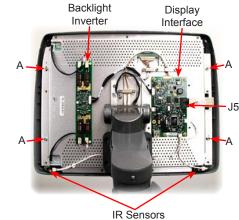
Display Assembly With Rear Panel Removed (old style LCD shown)
